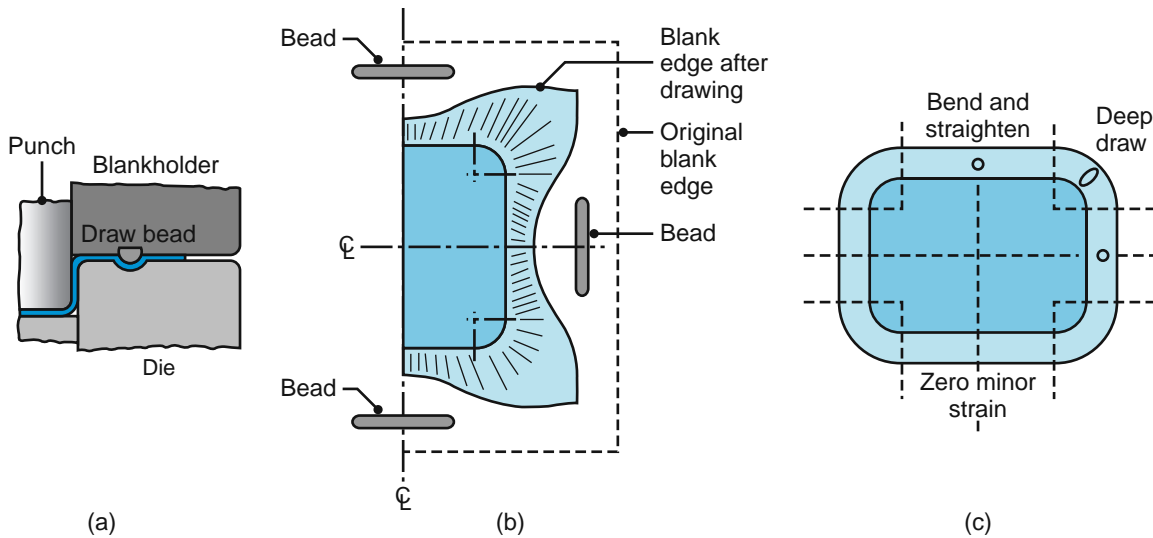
(a) Schematic illustration of a draw bead. (b) Metal flow during the drawing of a box-shaped part while using beads to control the movement of the material. (c) Deformation of circular grids in the flange in deep drawing.
